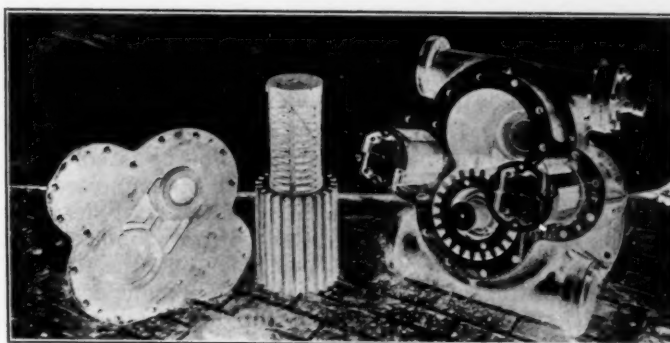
THE OIL PUMP DISASSEMBLED INTO ITS VARIOUS PARTS
